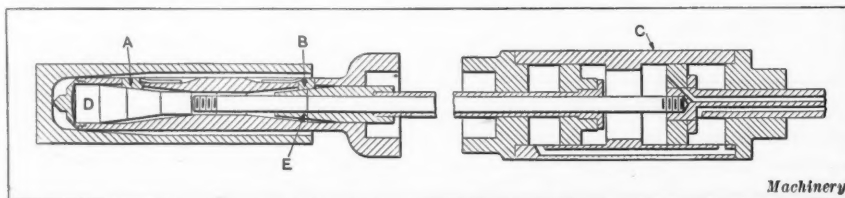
Diagrammatic View of Pneumatic Centering Arbor used in Centering Machines
